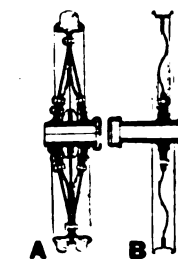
Two types of pressed steel wheels. A, built-up double plate-wheel for heavy work; B, stamped corrugated sheet wheel for light work.
